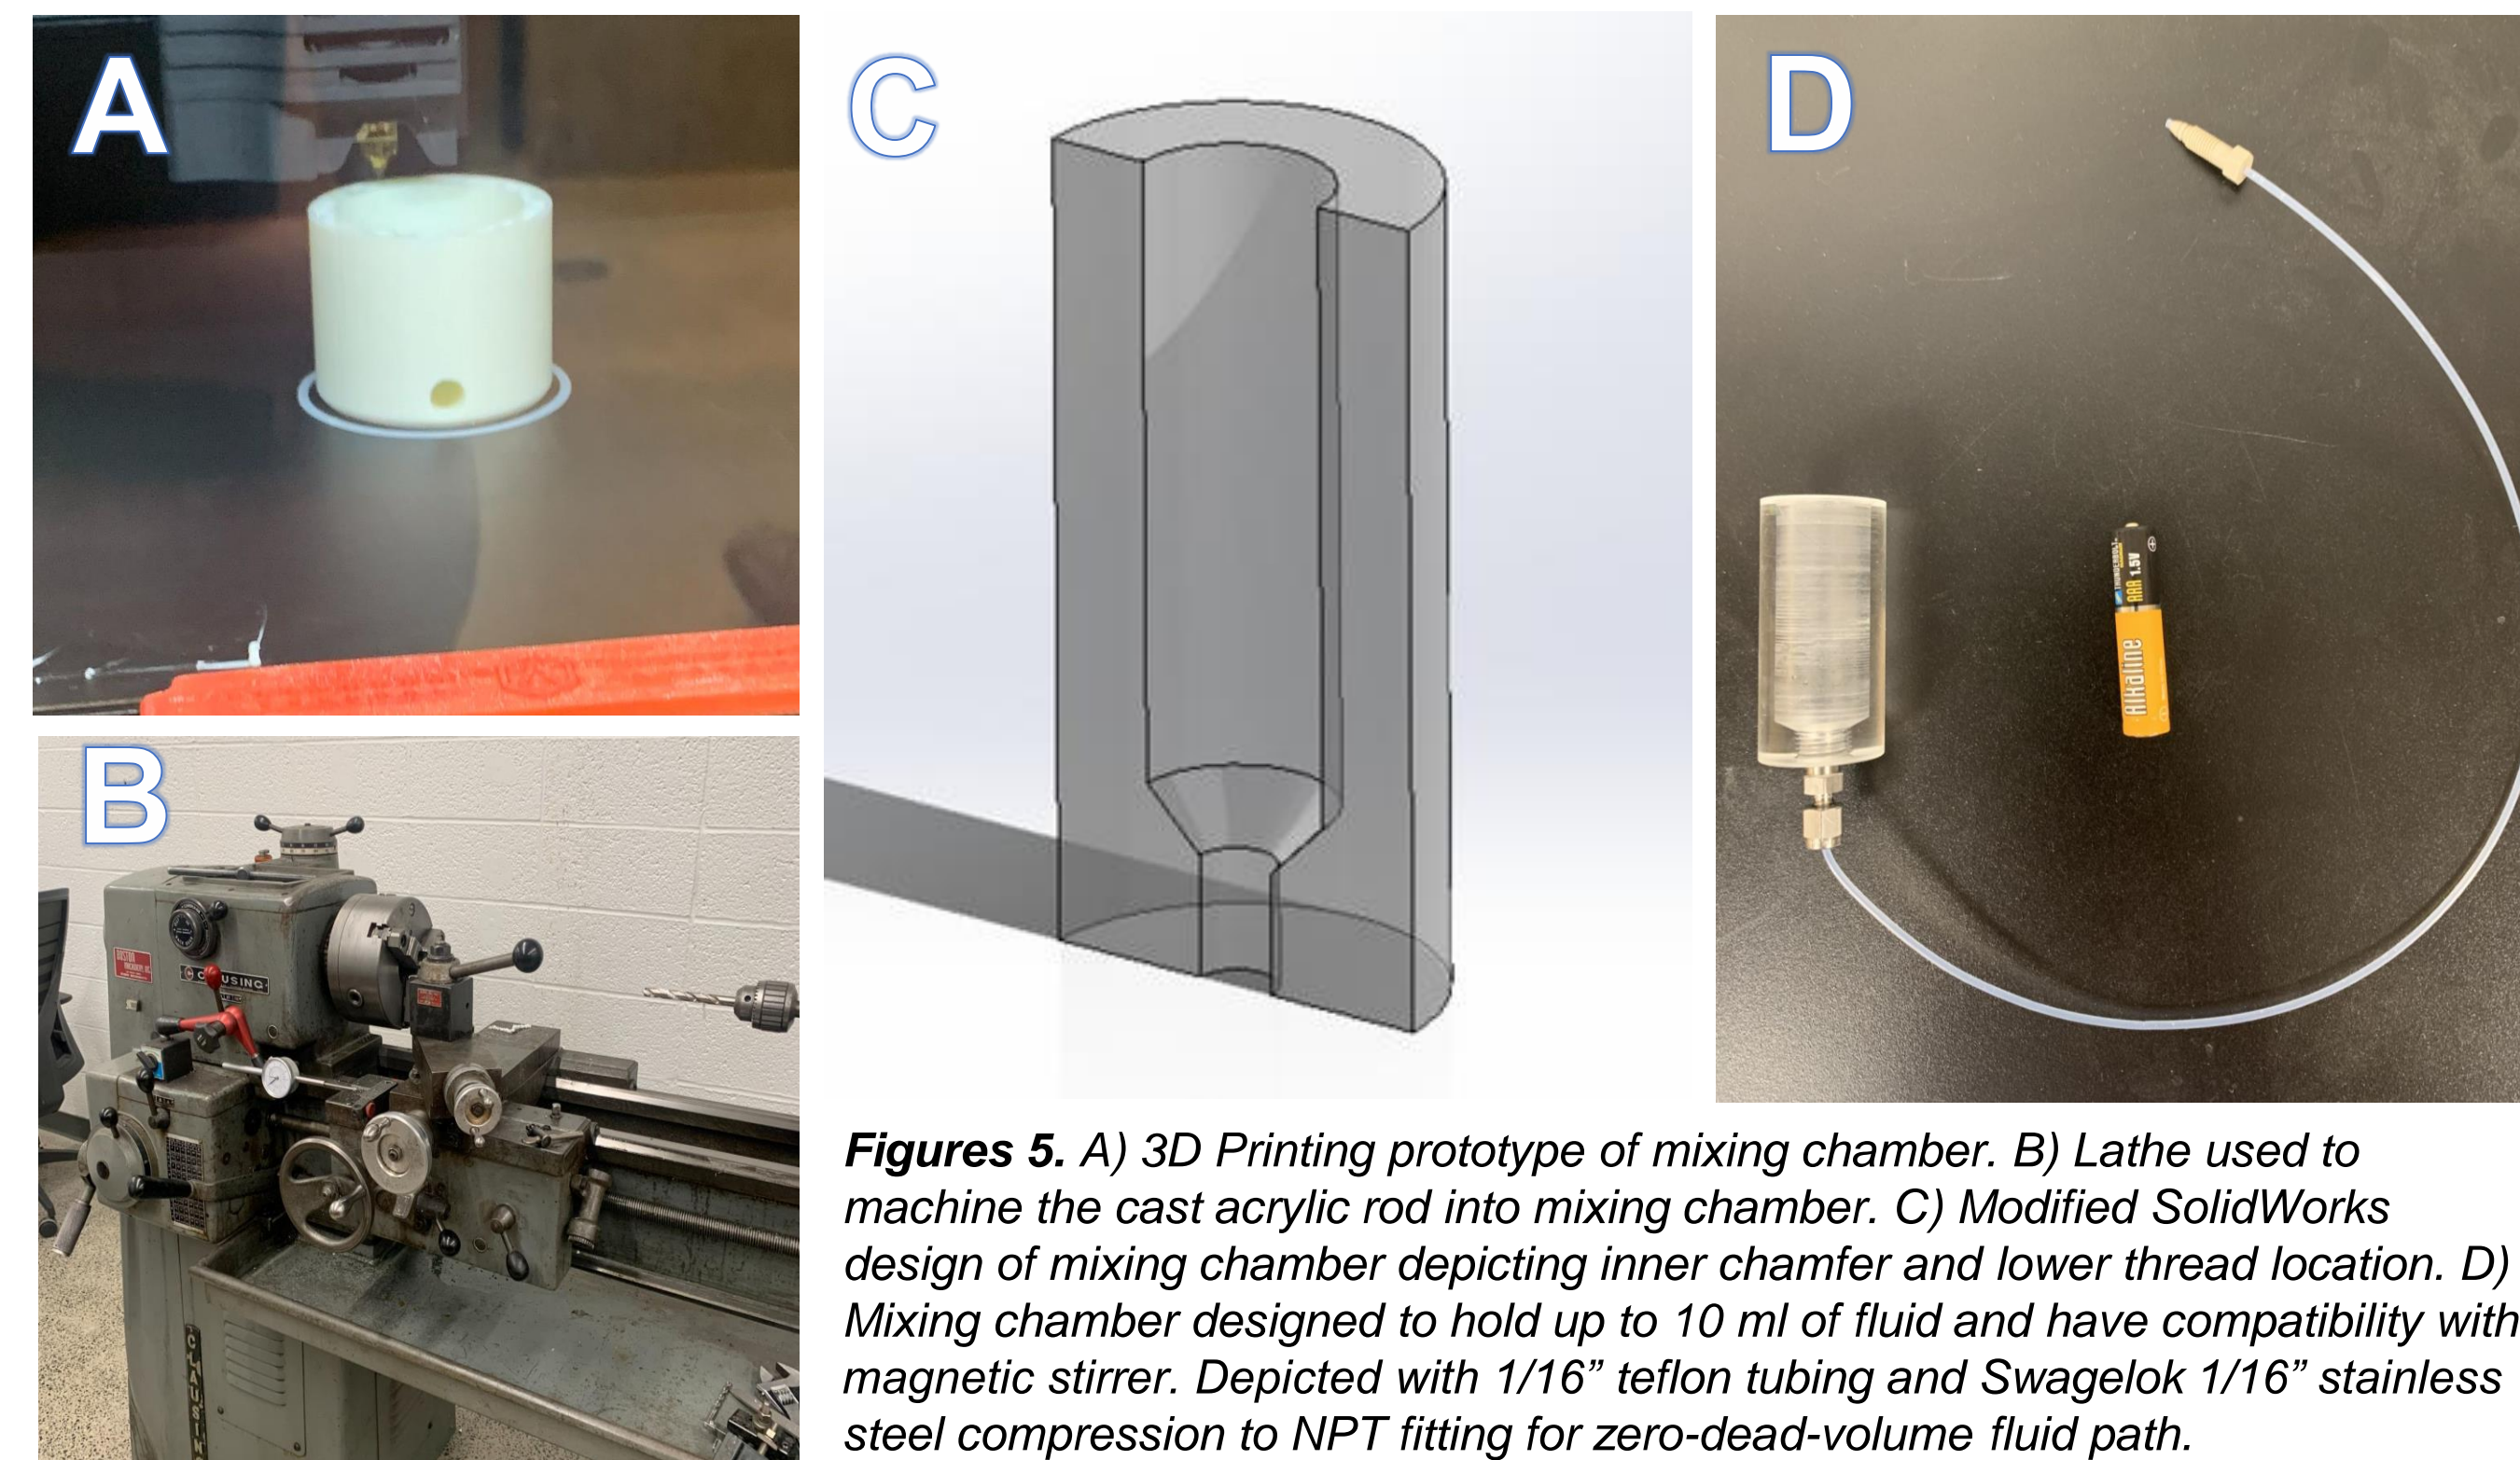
A) 3D Printing prototype of mixing chamber. B) Lathe used to machine the cast acrylic rod into mixing chamber. C) Modified SolidWorks design of mixing chamber depicting inner chamfer and lower thread location. D) Mixing chamber designed to hold up to 10 ml of fluid and have compatibility with magnetic stirrer. Depicted with 1/16" teflon tubing and Swagelok 1/16" stainless steel compression to NPT fitting for zero-dead-volume fluid path.
